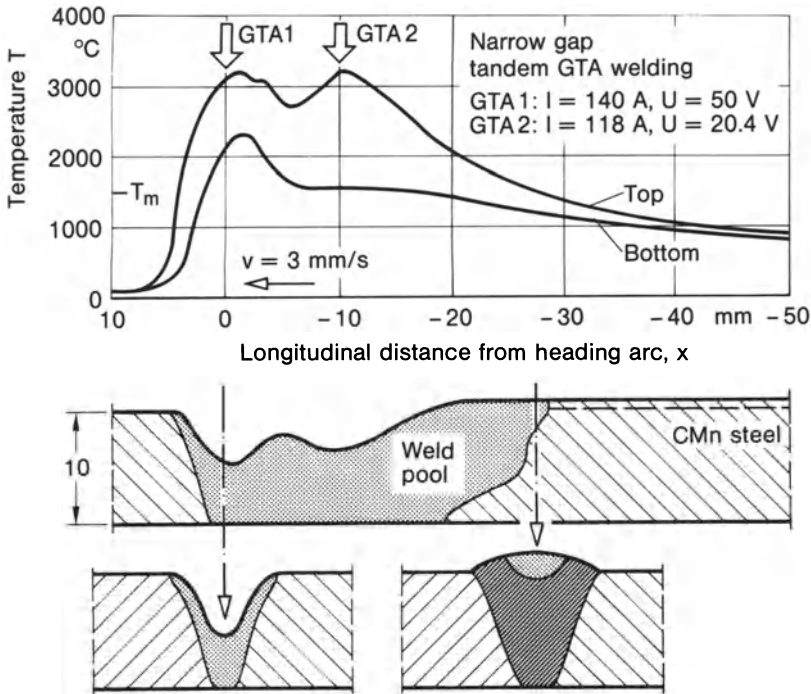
Molten pool and finished weld shape in narrow gap tandem welding of 10 mm thick CMn-alloyed steel plates, analytical results based on hydrostatic modelling; after Sudnik [86]
